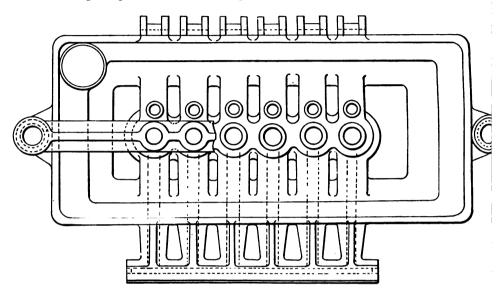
Grantype; multi-plunger pump. Plan. Scale: quarter size.
